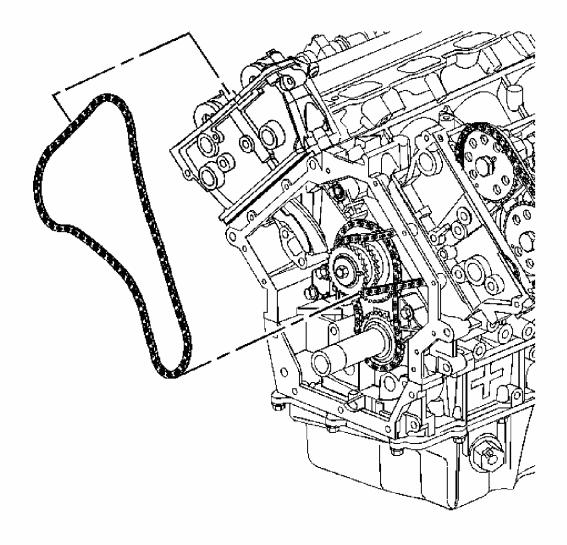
View of Right Secondary Camshaft Drive Chain Courtesy of GENERAL MOTORS CORP.
